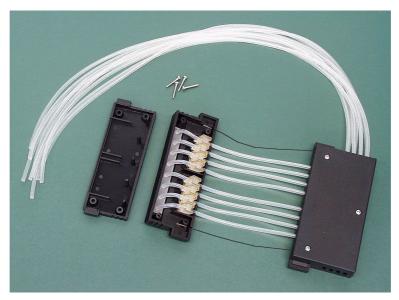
Removing the cover plate of the lower part of the dispensing cassette
